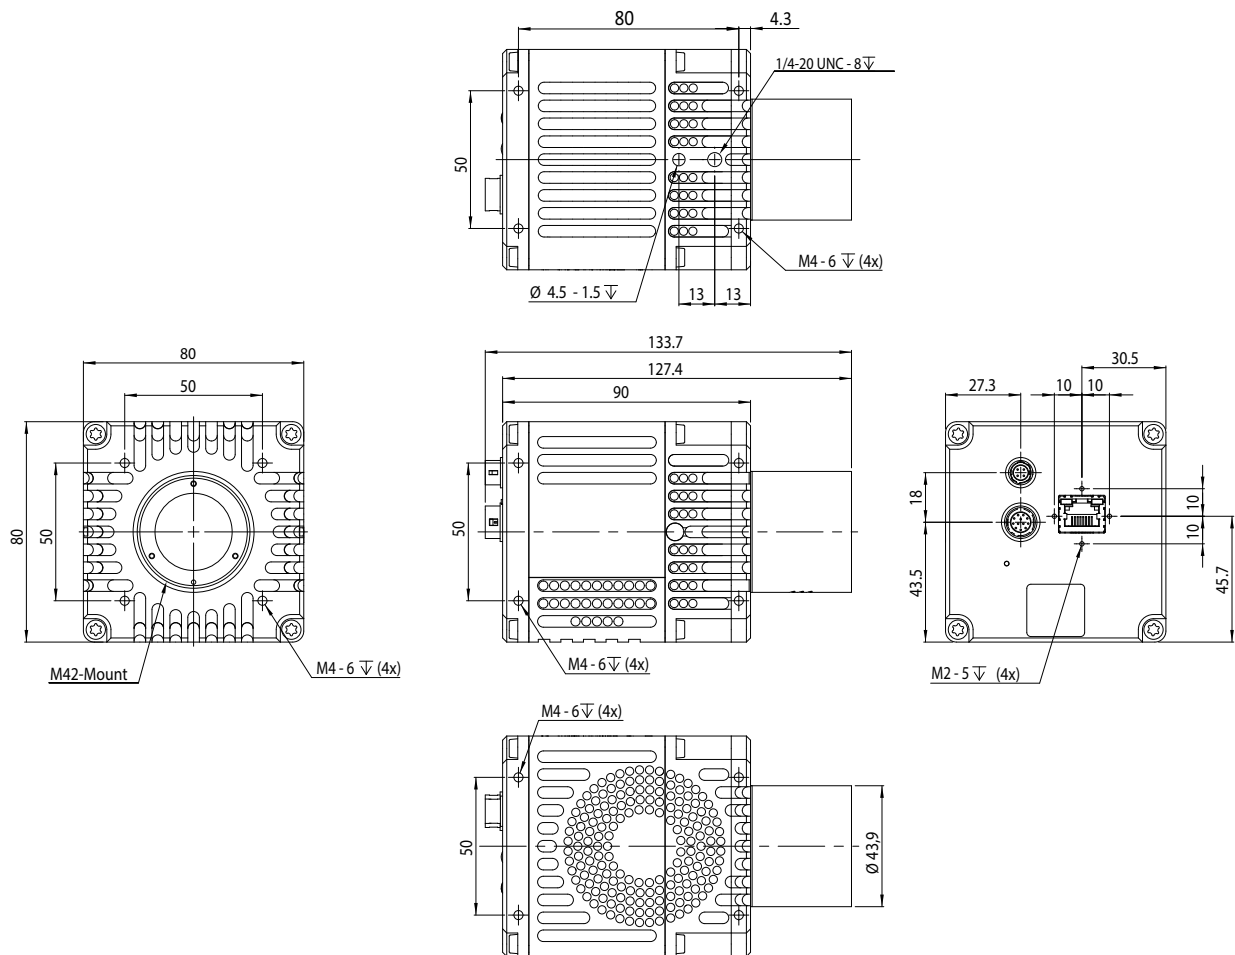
Goldeye G-008 SWIR Cool TEC1, -032 SWIR Cool TEC2 with M42-Mount adapter
